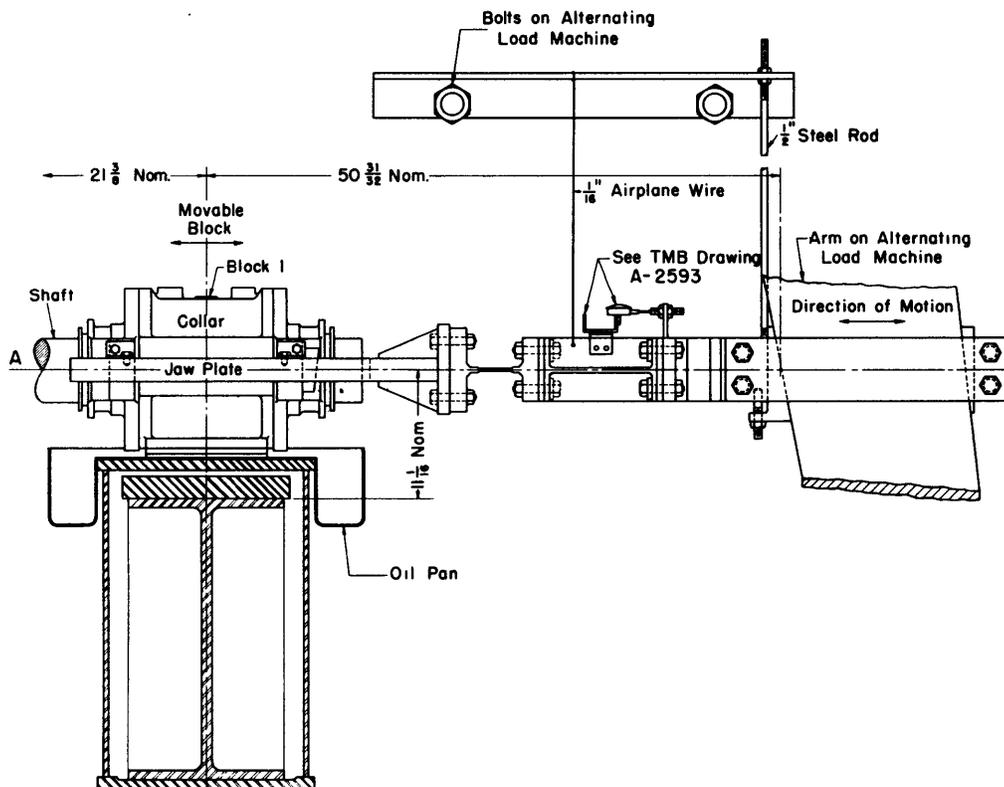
Longitudinal Elevation of 0.3-Scale Model Restraining Block
